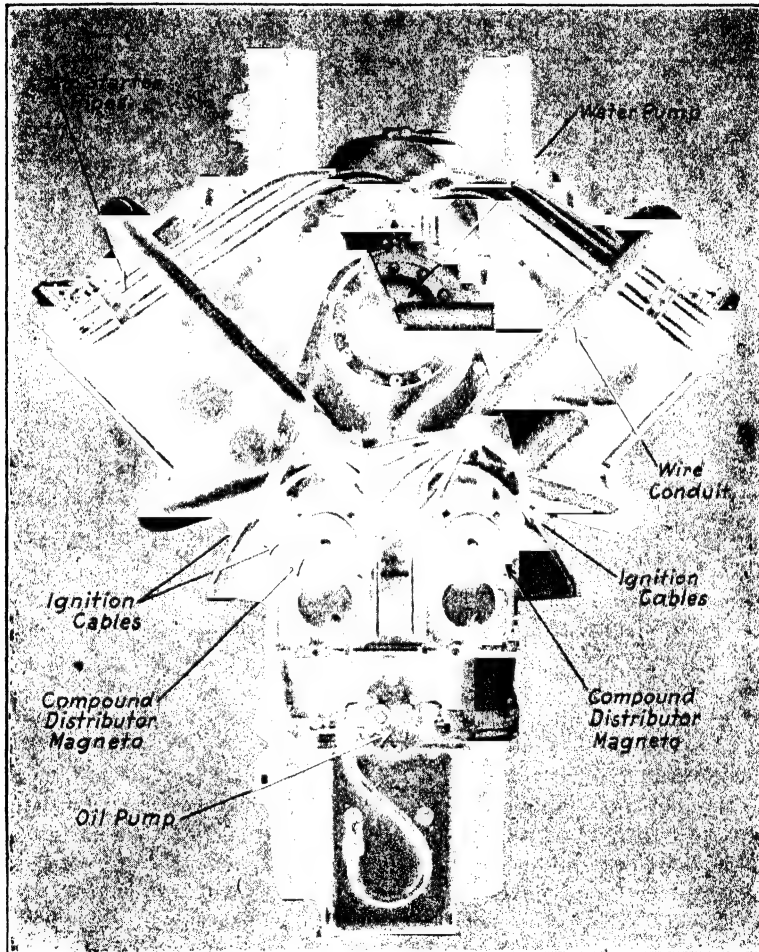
How Magneto Ignition was Installed on Early Thomas Morse 135 Horsepower "Vee" Engine.
